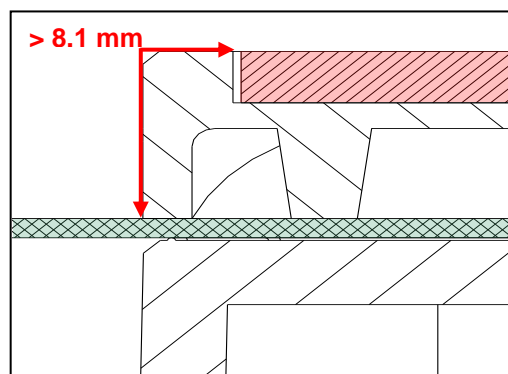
Cross section sketch with distance from pressure plate to PCB
